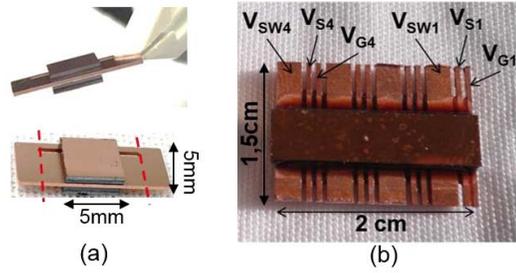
Photographs of the assembly of (a) one and (b) four switching cells realized at die level
